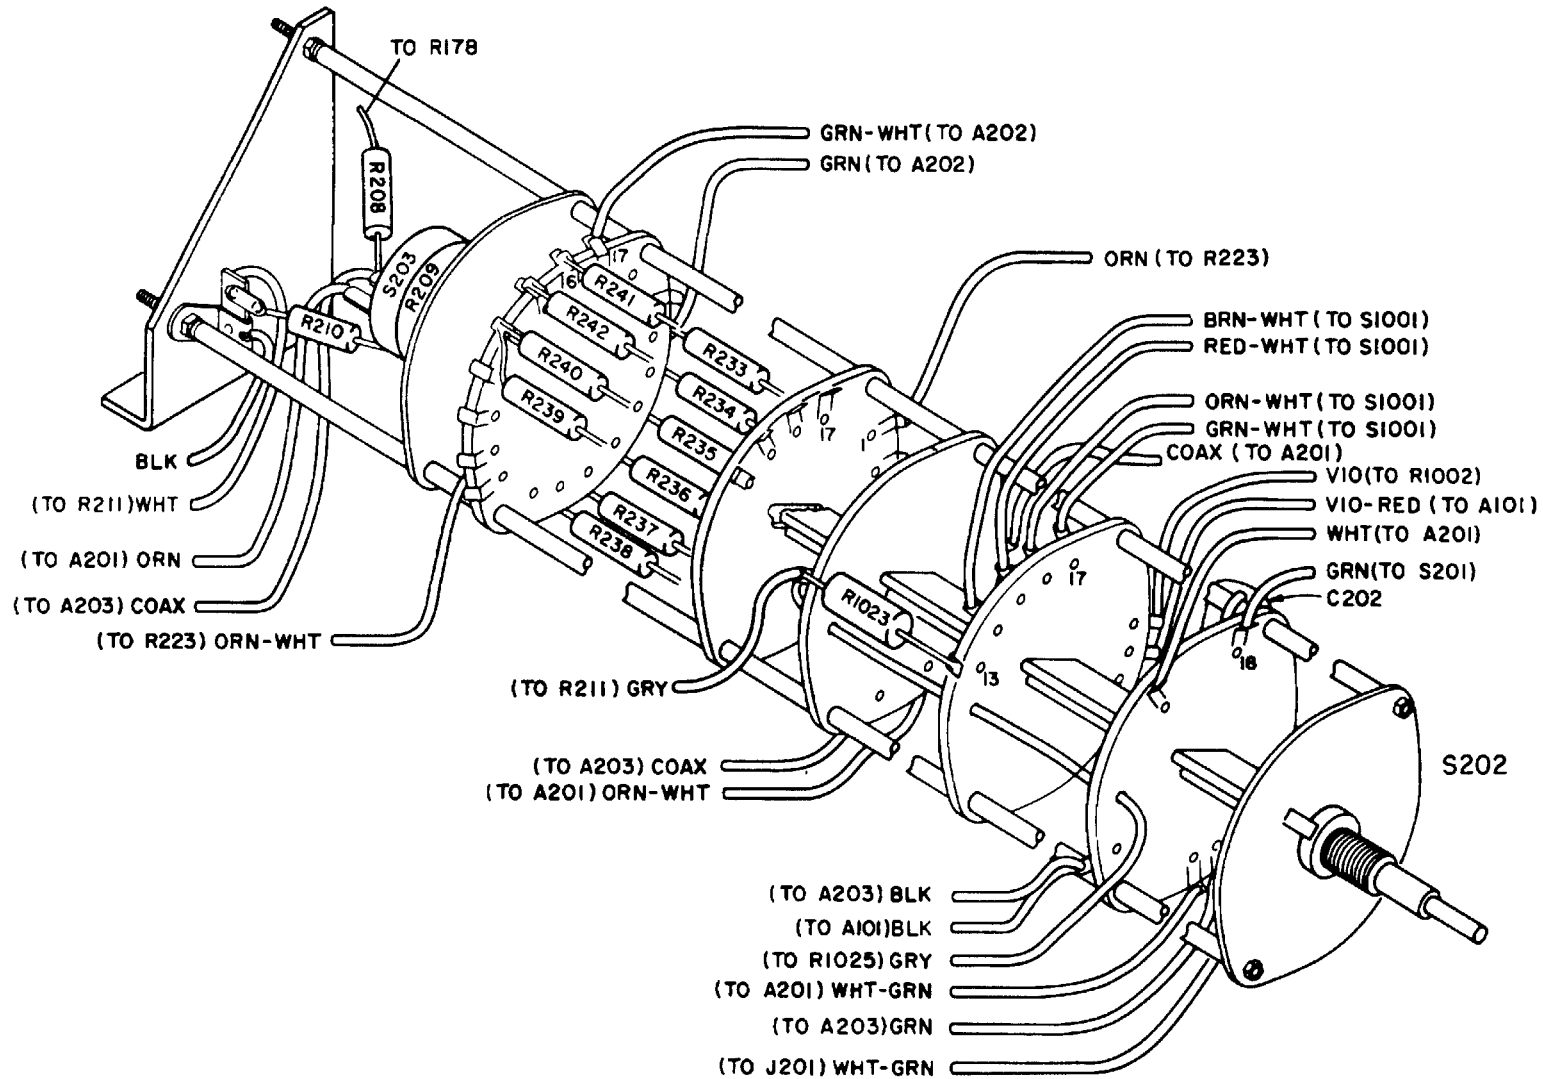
A. External Vernier/Horizontal Display Switch Assembly A200. Location of Parts
